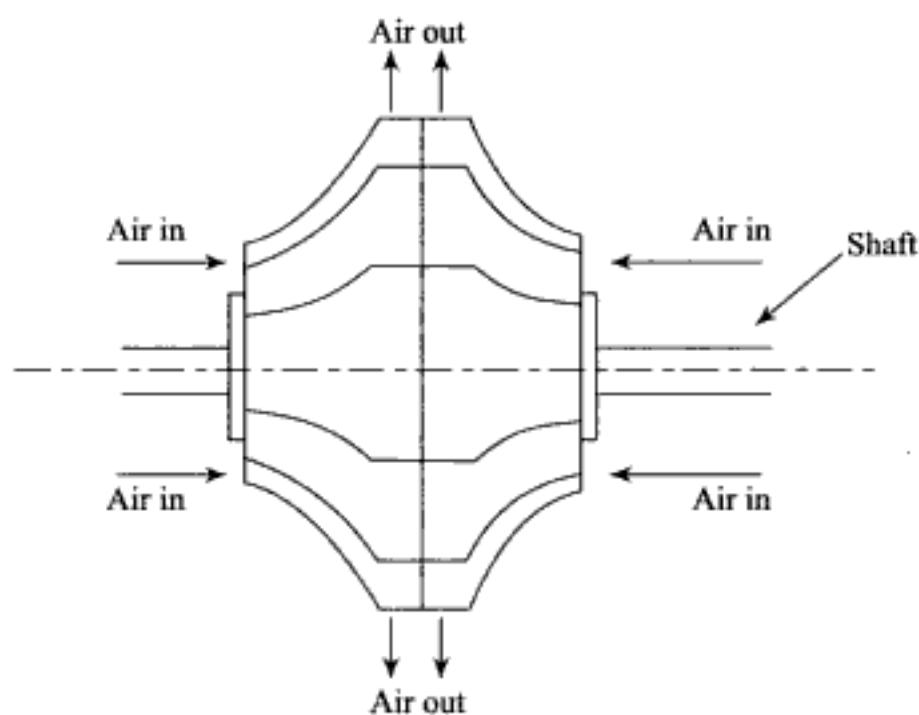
Double-sided impeller of a centrifugal compressor
